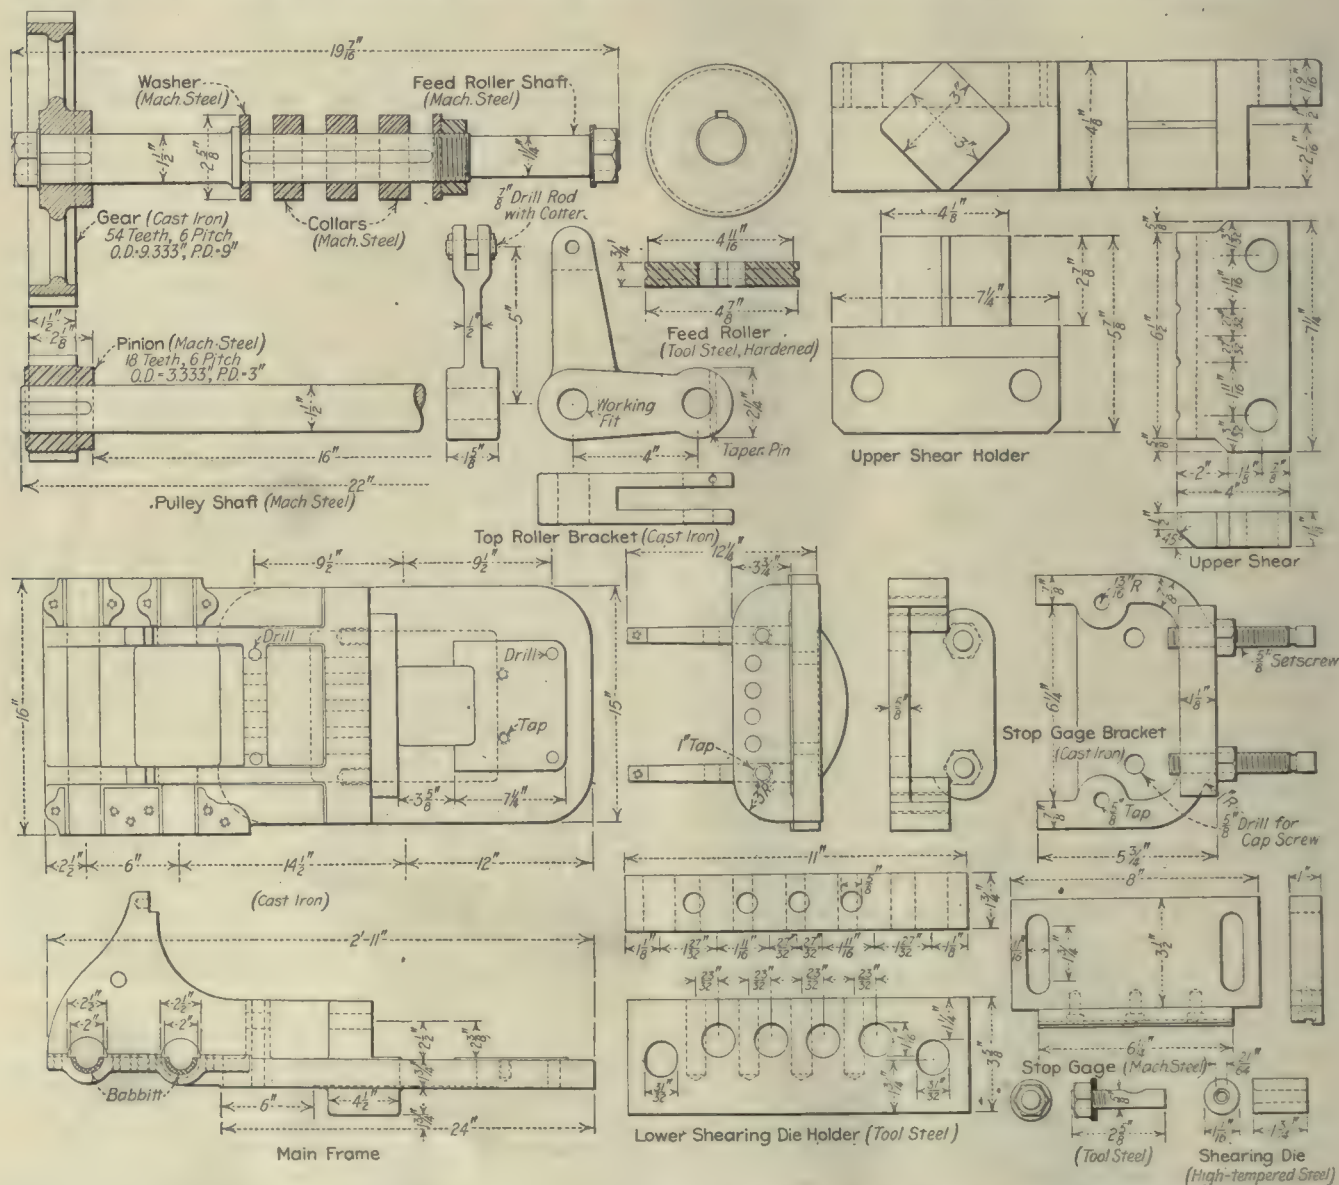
DETAILS OF A FIXTURE FOR CUTTING ROUND BAR STOCK ON A PUNCH PRESS
